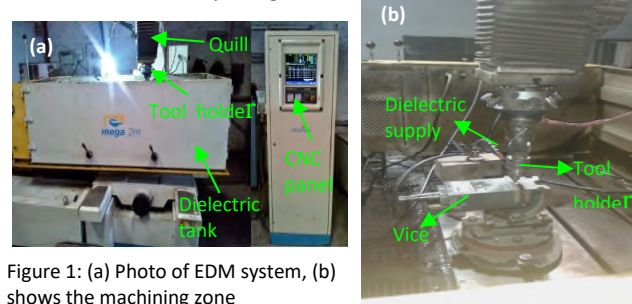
(a) Photo of EDM system, (b) shows the machining zone
